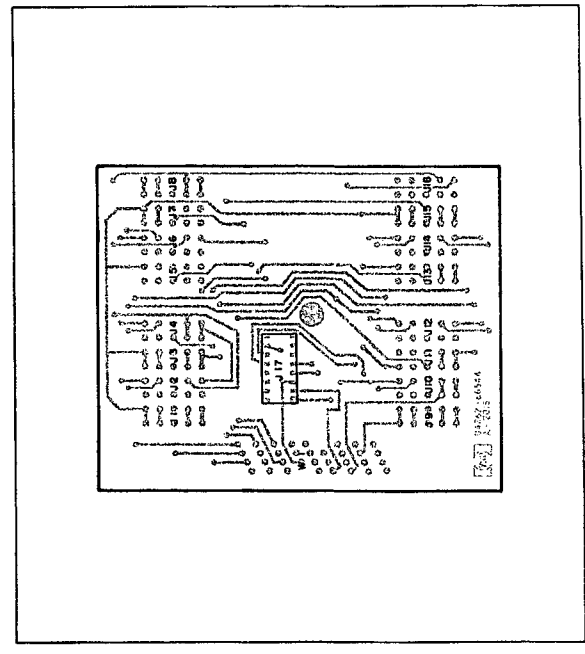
A4 Thumbwheel Switch Board Assembly Component Locations.
